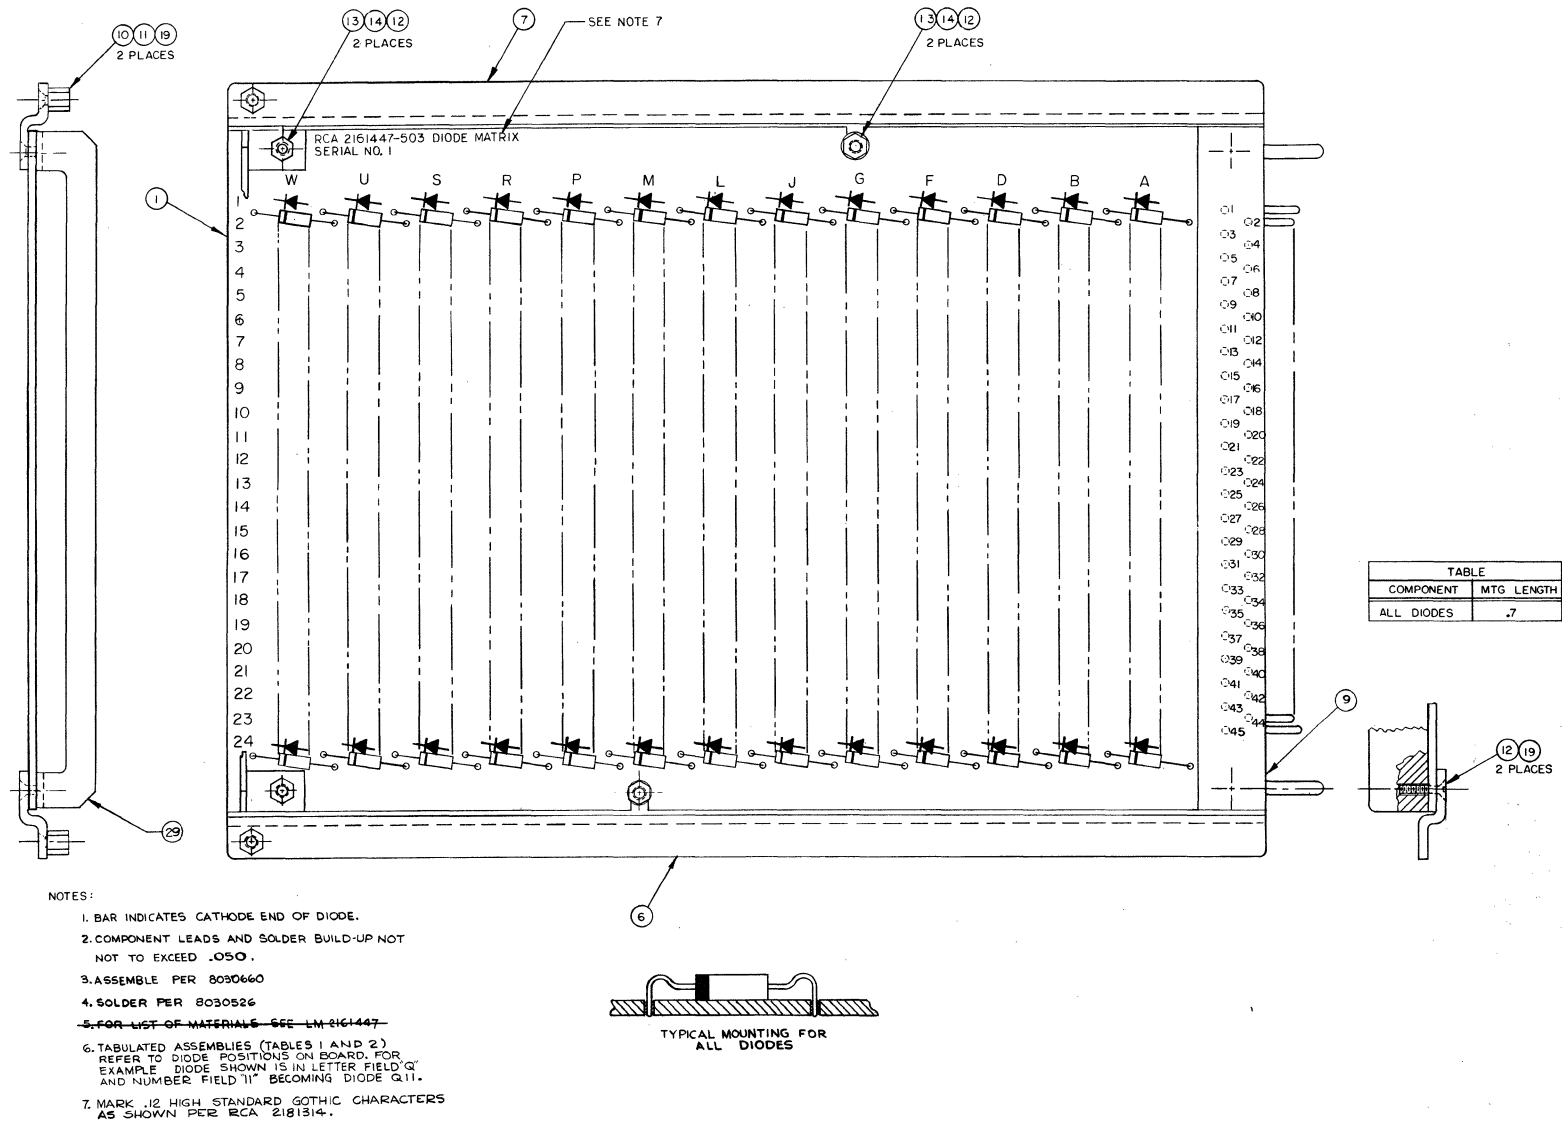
Diode Matrix Module, Assembly Drawing (Sheet 1 of 2)
